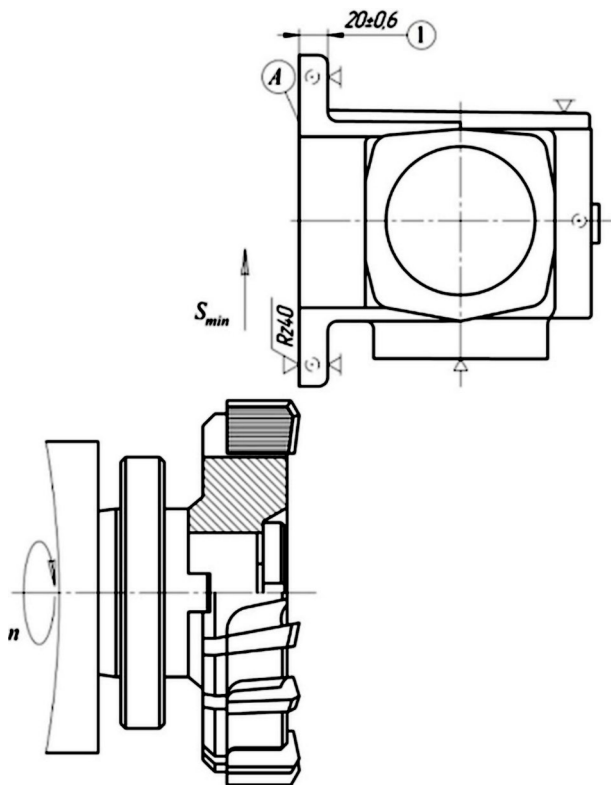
Sketch map of the operation 005 (horizontal-milling) for machining of reduction-gear housing
